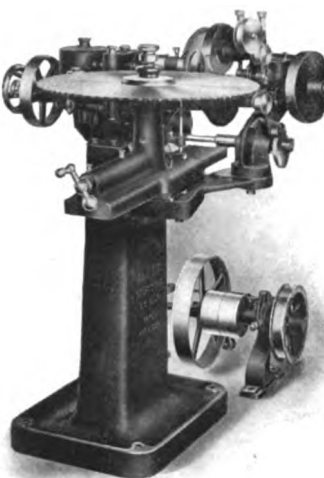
No. 11 Automatic Saw Sharpening Machine
